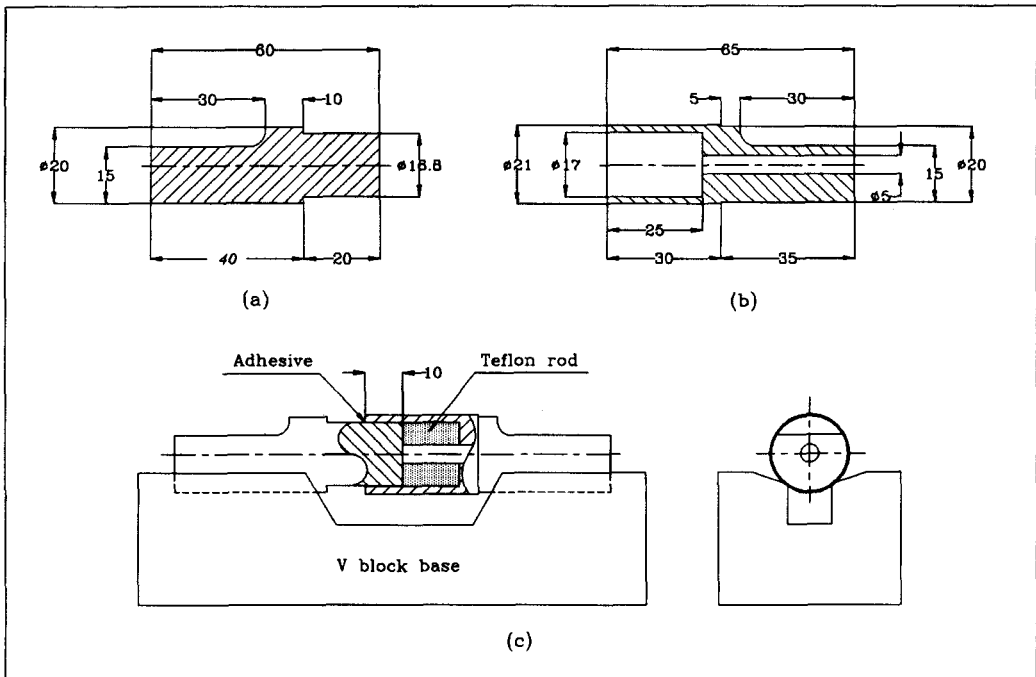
Dimensions (mm) of the adherends of the tubular single lap joint: (a) Inner adherend (b) Outer adherend (c) Assembled tubular single lap joint.
